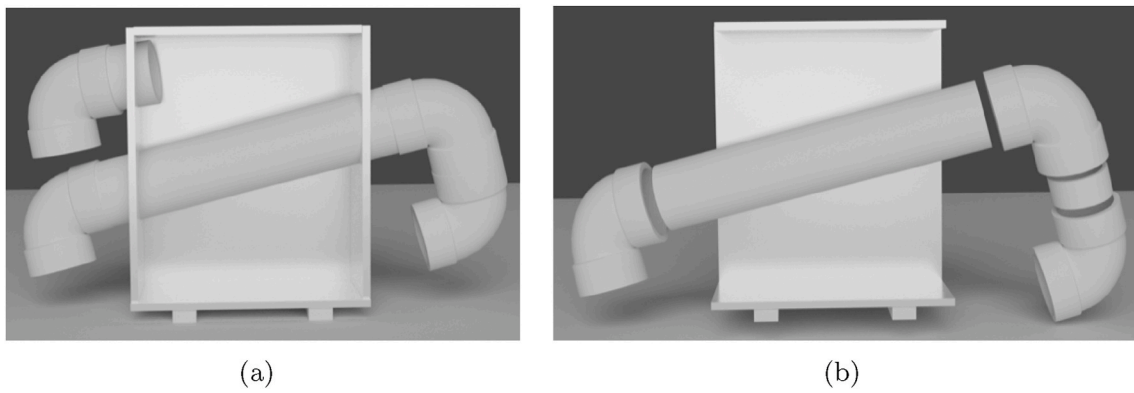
Air sampling component of Prototype V₂ (a) and its exploded view, with only the hollow tube visible (b).
